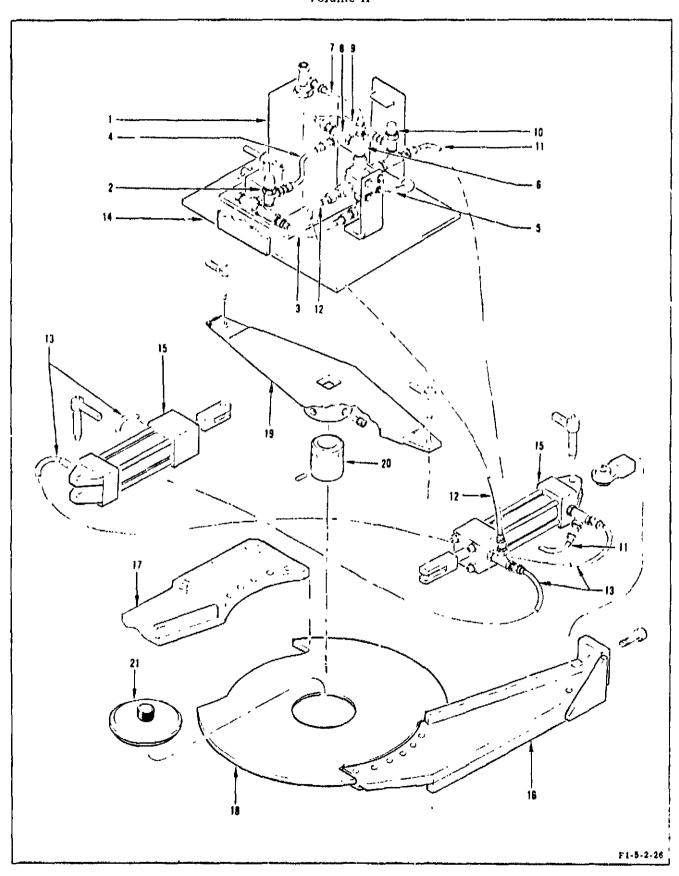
Hydraulic Torque Tool T-5029452 (Sheet 1 of 2)
